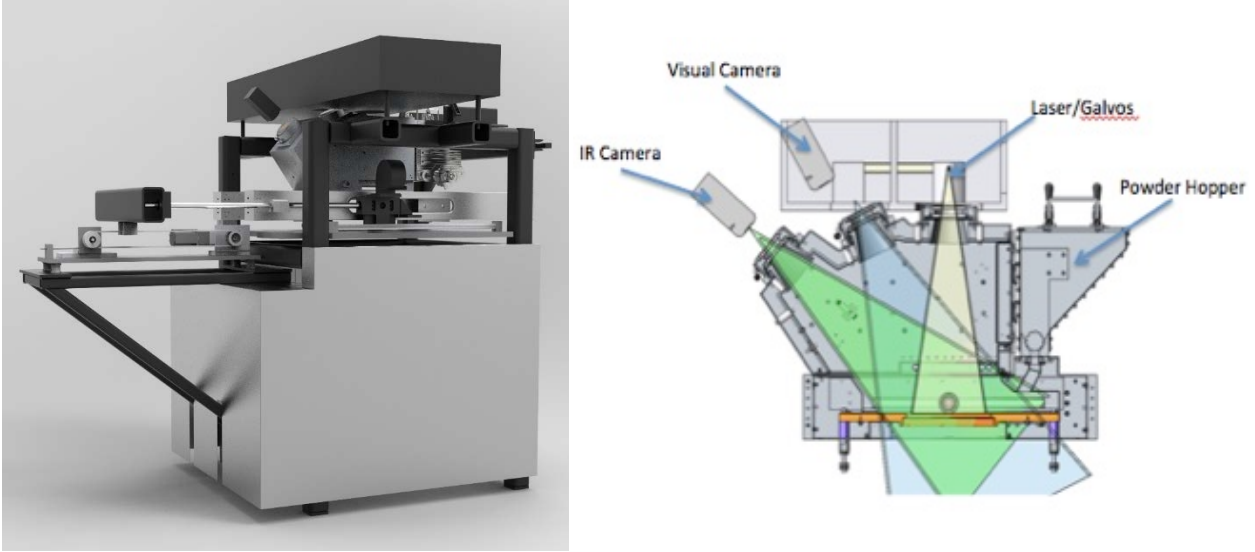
(Left) External View of LAMPS CAD geometry (Right) LAMPS Build Chamber Cross Section
